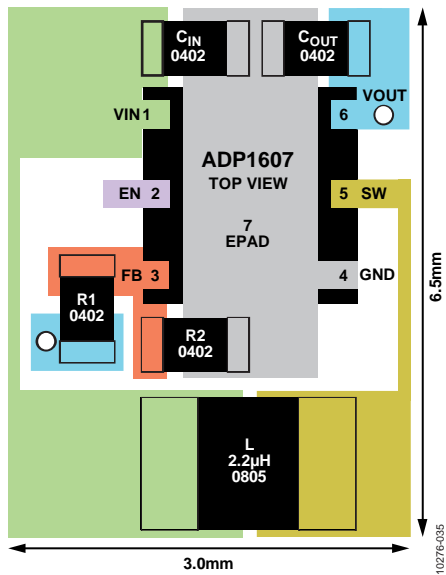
ADP1607 Recommended Layout Showing the Smallest Footprint
